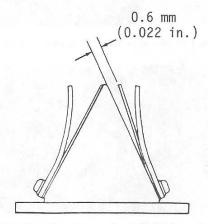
View showing maximum limit of reed petal stand open.
